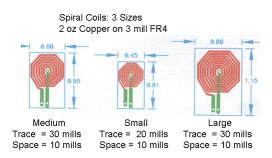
Spiral inductors built as copper conductors embedded in the DC-DC converter PCB.
